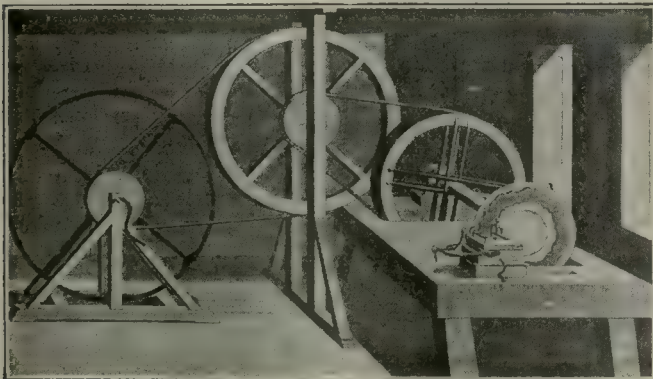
TURNING A SILVER PLATE OF IRREGULAR OUTLINE. NOTE THE TOOL CONTROLLING ARRANGEMENT
